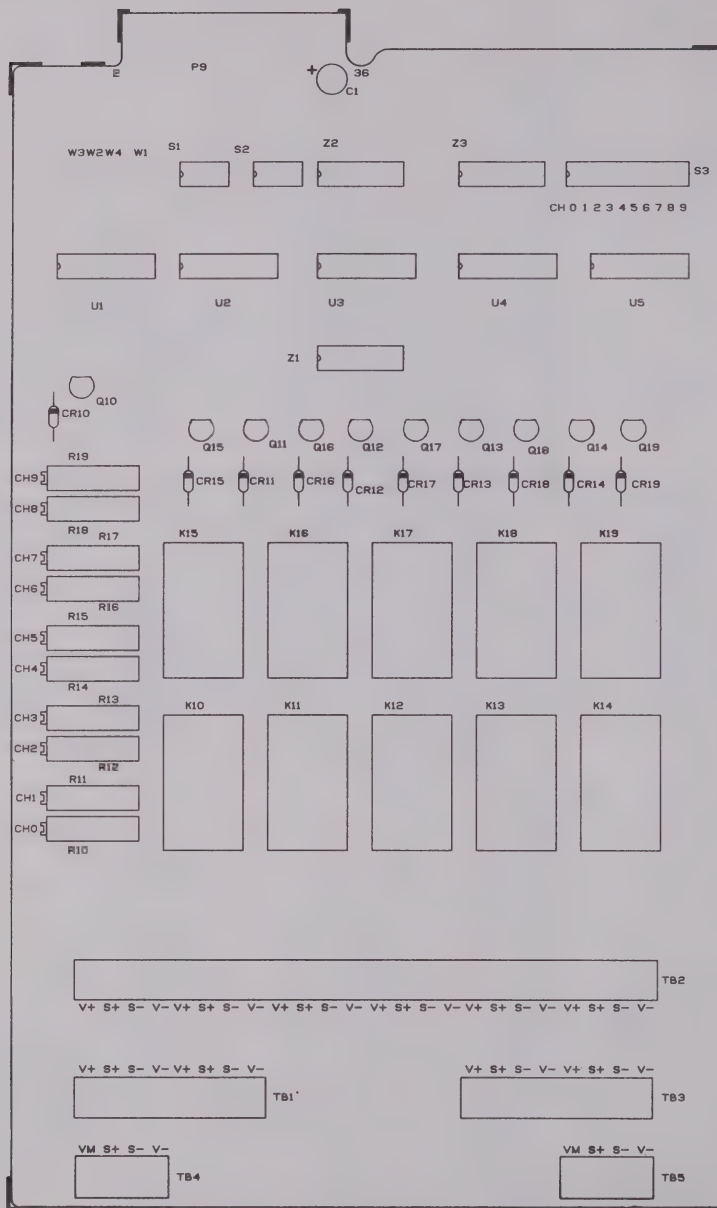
Option-002, Thermocouple Scanner PCB Assembly
